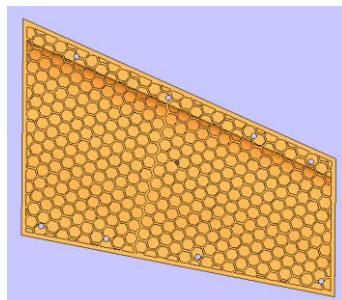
A bottom view of a of the printed mold CAD file. The whole mold area is supported with honeycomb support ribs.
